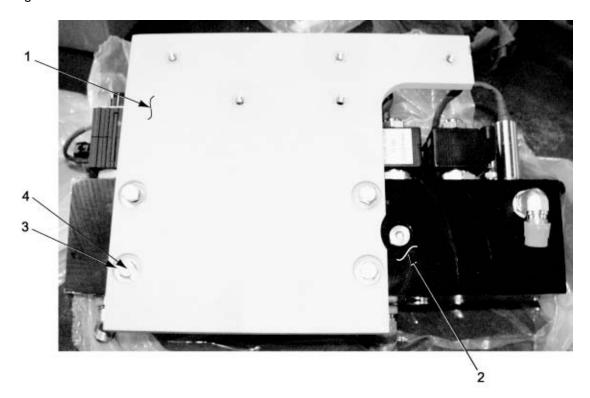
Installation of Mounting Plate on Primary Manifold Assembly
